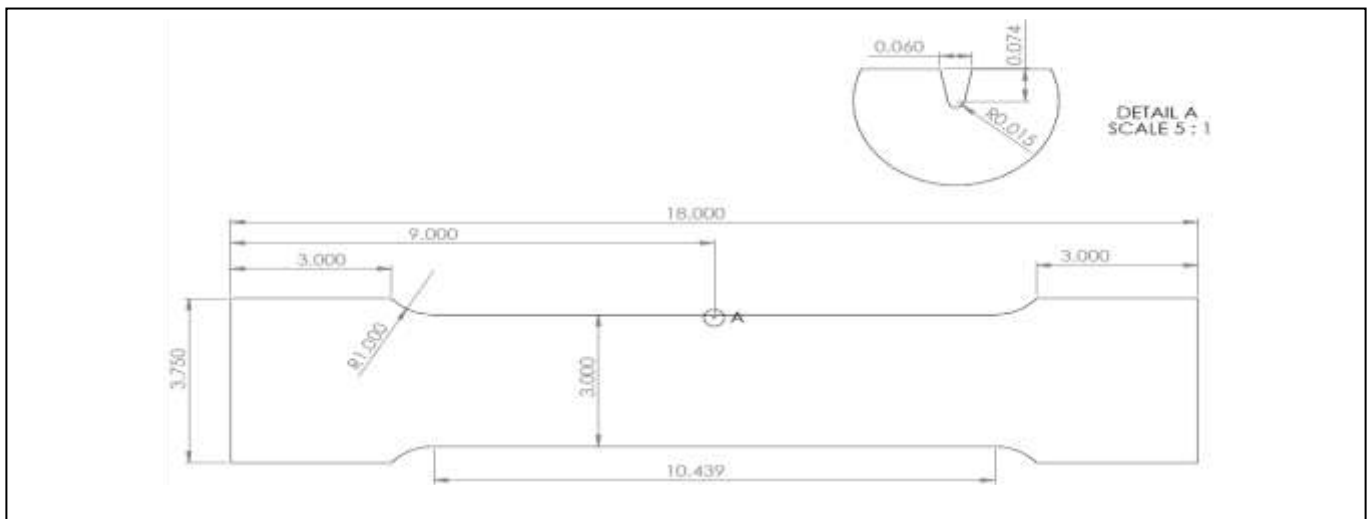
Machining Dimensions for the Test Specimens Showing the Initial Notch
